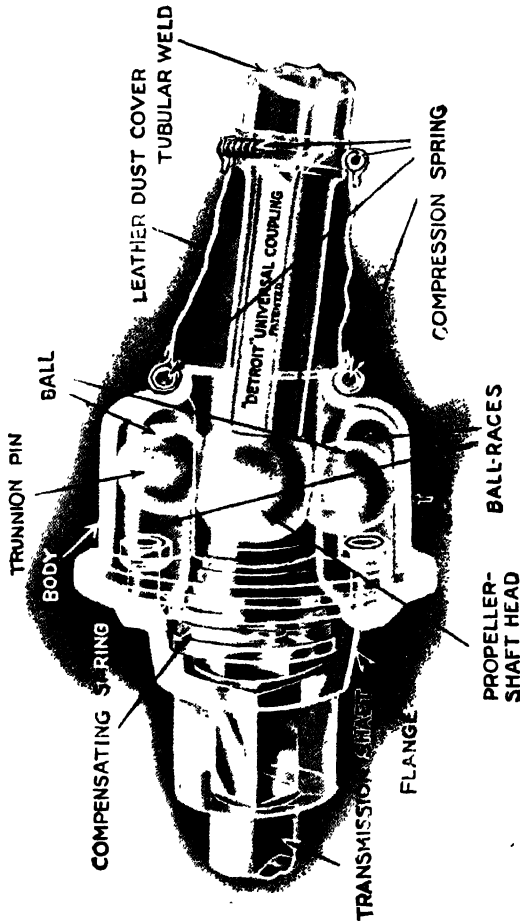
Propeller Shaft and Universal Joint. (Paige.)
